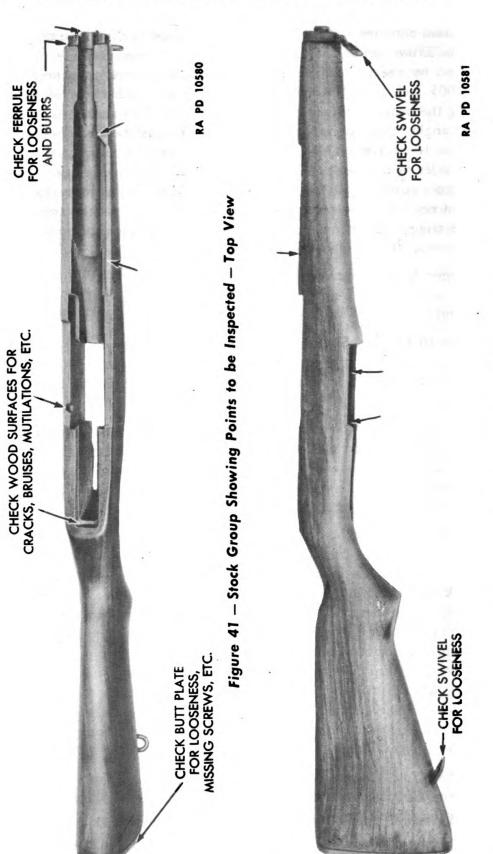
Stock Group Showing Points to be Inspected - Side View
